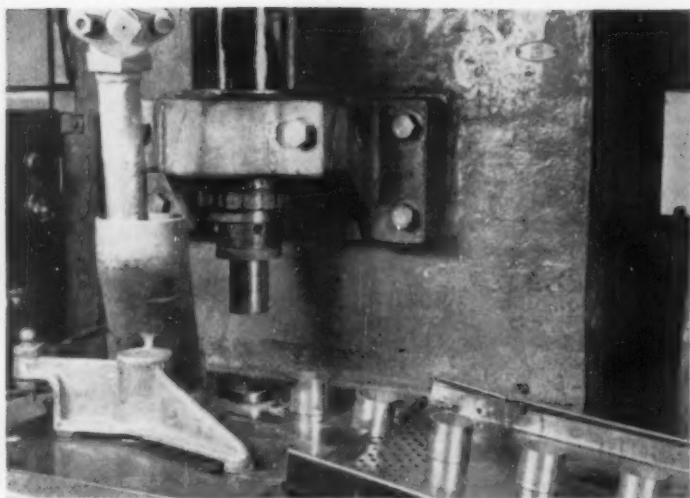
Typical of the mechanical presses now being used by iron powder parts producers is this 80 to 100-ton capacity unit at Amplex Oilite Products, Chrysler Corp., shown turning out a machine part. Converting this press to rotating band production could be achieved just by changing dies and making adjustments in pressure and the automatic powder feed. The smaller sizes of bands have been turned out at a rate of hundreds an hour.
